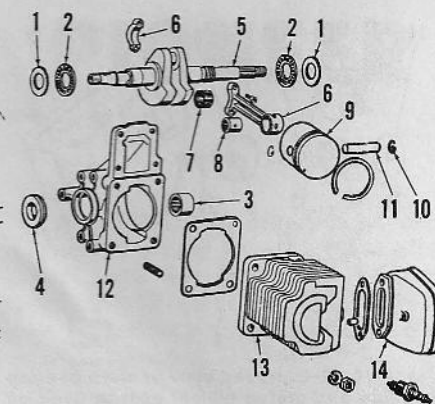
Exploded view of the crankshaft, crankcase and cylinder typical of all models.
